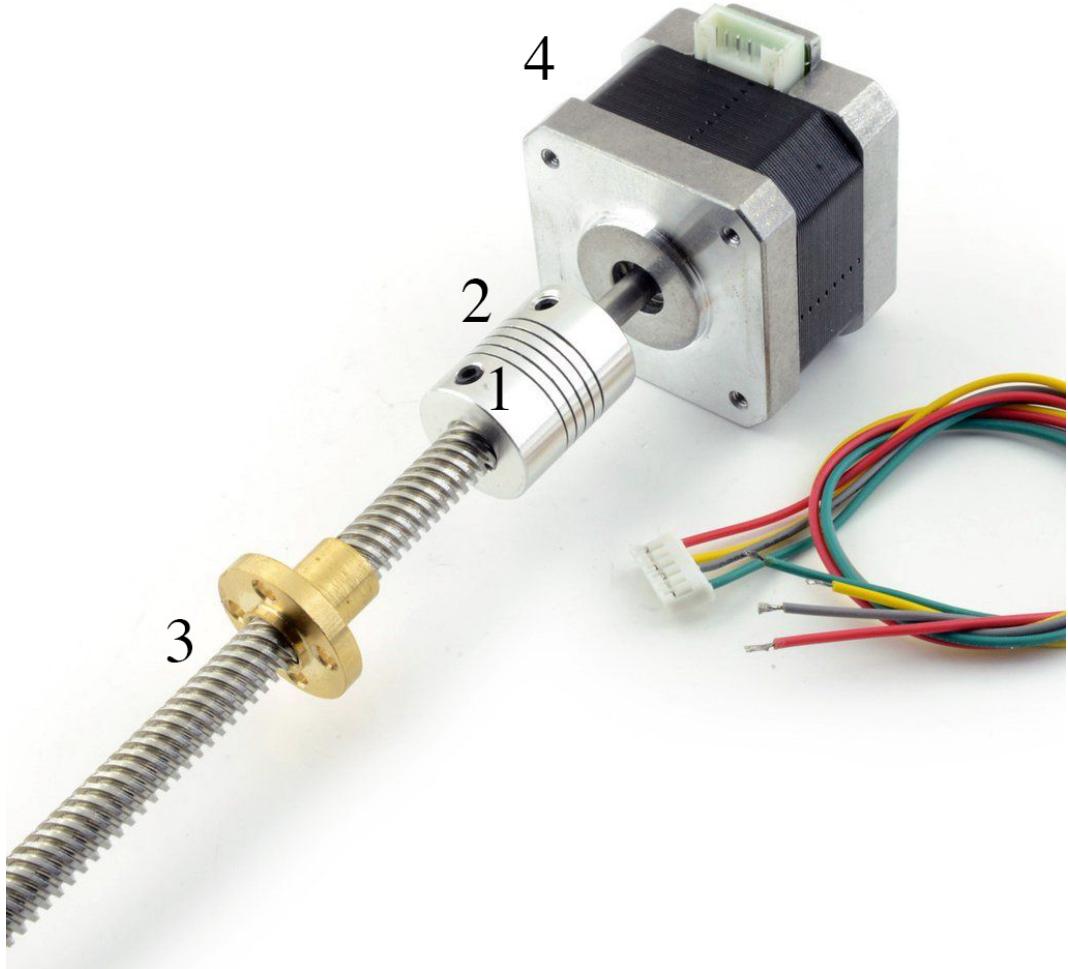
Photo showing a flexible coupling (1,2) connecting a lead screw (3) and motor (4) [51]
